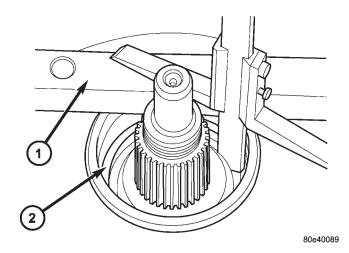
Measure From Transmission Housing To Rear Bearing Contact Surface
